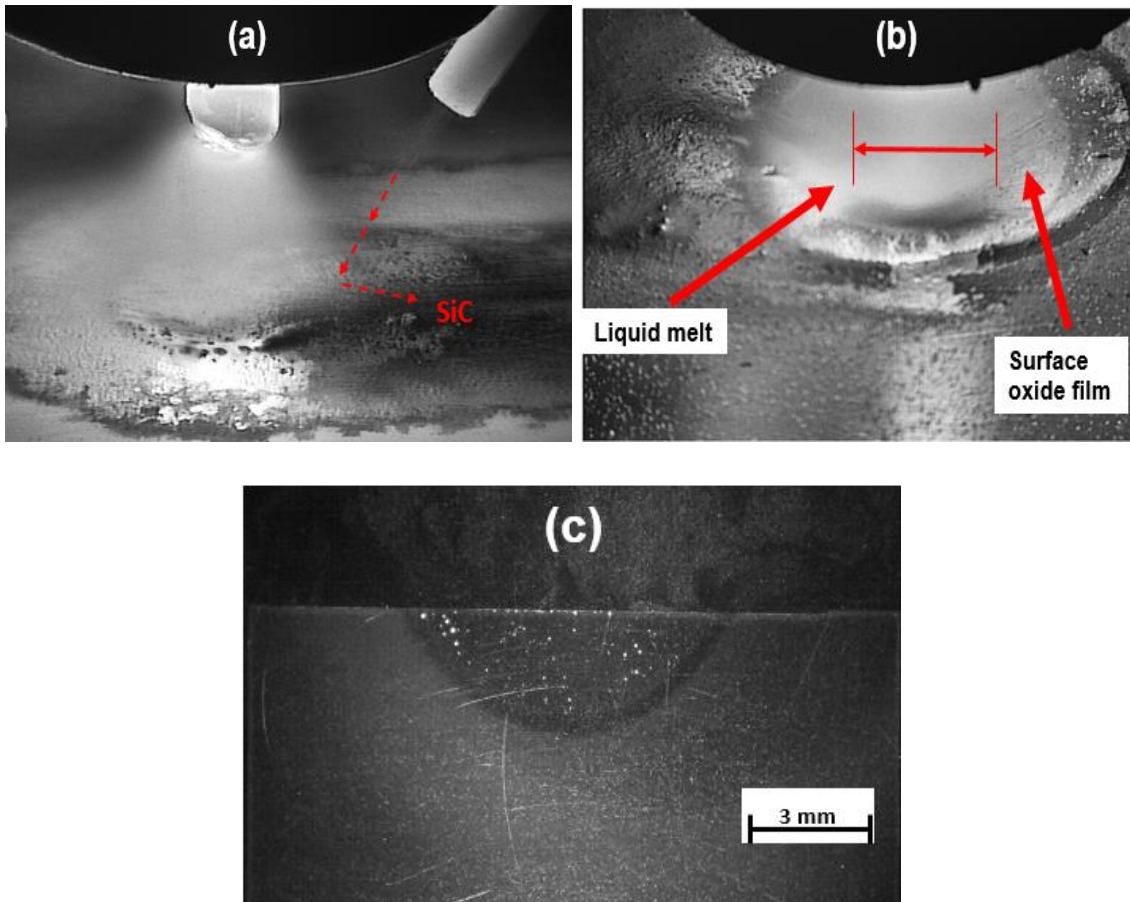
Images of weld pool without filler wire (a) particle injection in melt (b) autogenous melt pool and (c) cross section of bead with injected particles (melt penetration depth = 3.04 mm)
